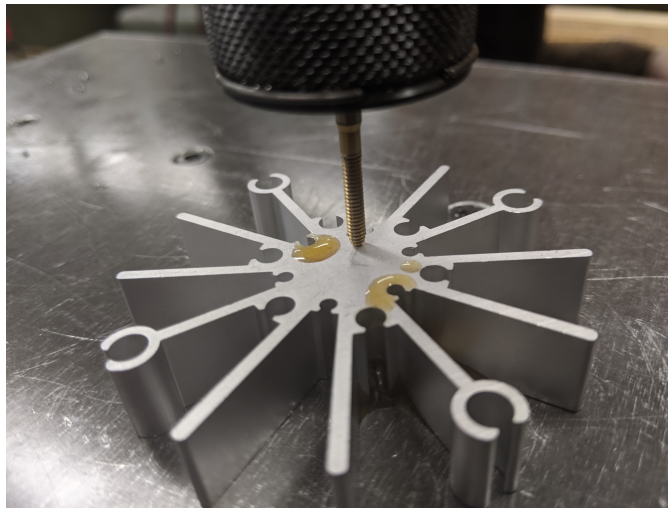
Two of the innermost holes on the extruded heatsink must be 4-40 tapped.
